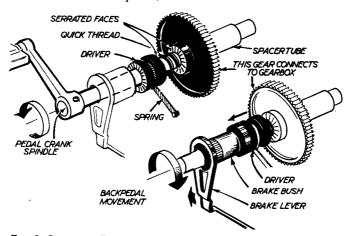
SIMPLIFIED DRAWING OF THE PEDAL CRANK SPINDLE ASSEMBLY
